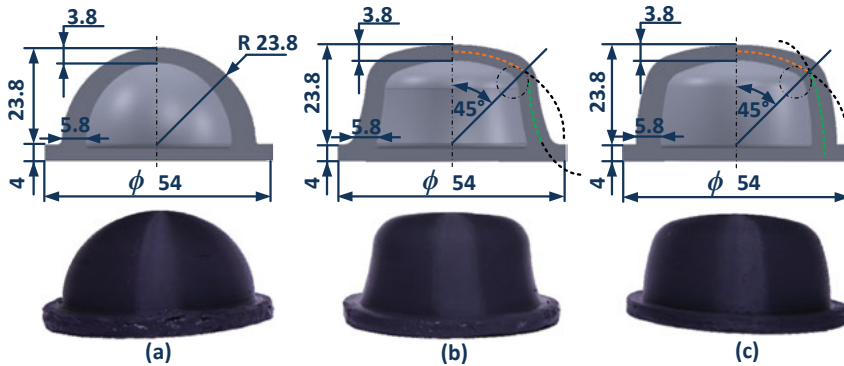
Above: cross section and geometric details of the three studied samples. Below: photo of the manufactured samples. Cross-sections: (a) semi-spherical, (b) cylindrical-convex, (c) cylindrical-concave.
